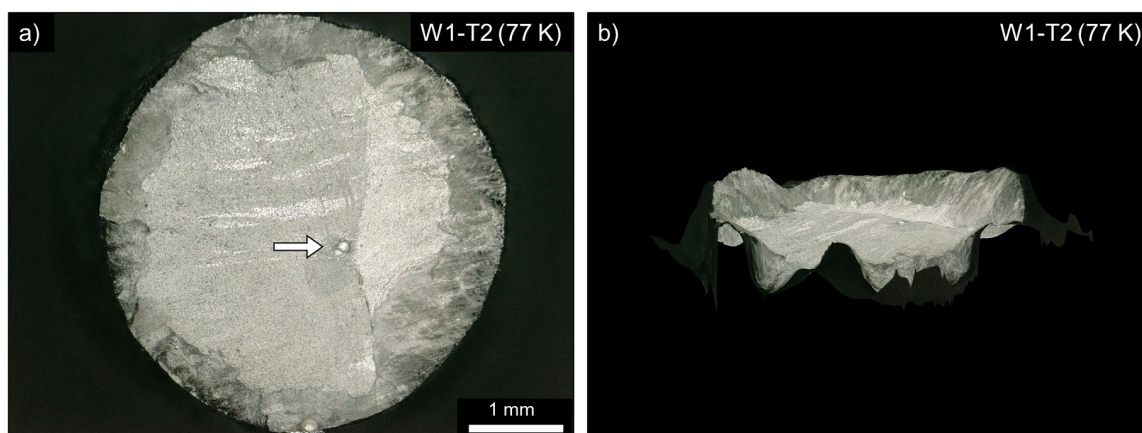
Typical cup-and-cone fracture morphology of a tensile specimen tested at 77 K (W1-T2 pictured, cup morphology). a) flattened image, b) cone morphology.
